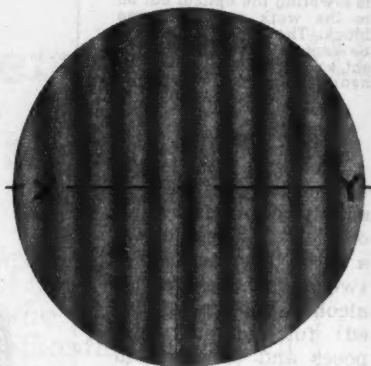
A—The work surface is accurately flat, as shown by the straightness, parallelism, and even spacing of the bands. There is a wedge-shaped layer of air between the work and the flat. Press with the finger at X or Y. At one of these points, pressure causes the bands to broaden and become fewer. This point is the thickest part of the air wedge (low point of work). Difference in height between X and Y is $8\frac{1}{2}$ bands or 98 millionths of an inch.
